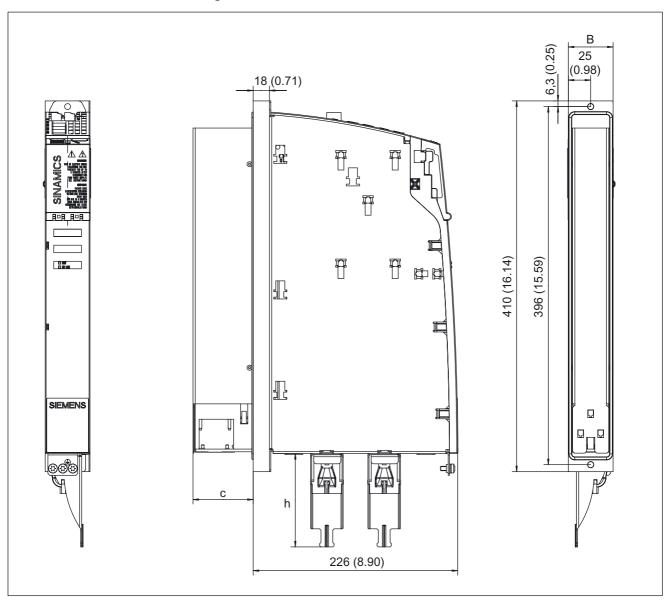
Dimension drawing of Motor Module with external air cooling 3 A to 18 A and 2 x 3 A to 2 x 9 A
